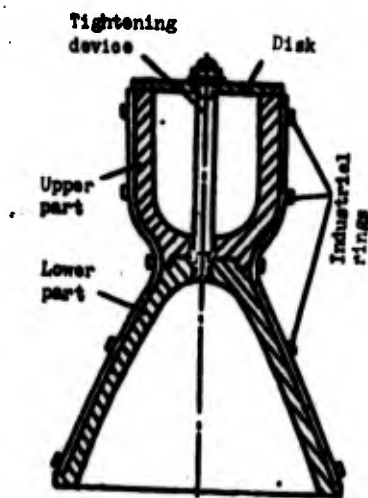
Mandrel for the assembly of a KS of tubular construction.
